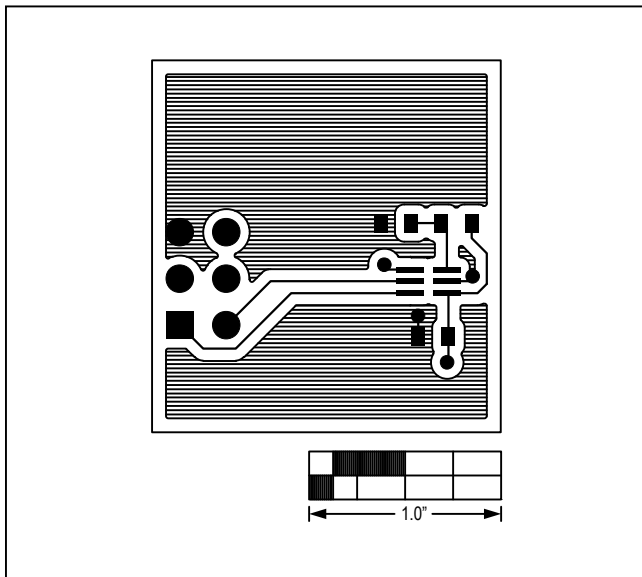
MAX44006 Daughter Board PCB Layout—Top
